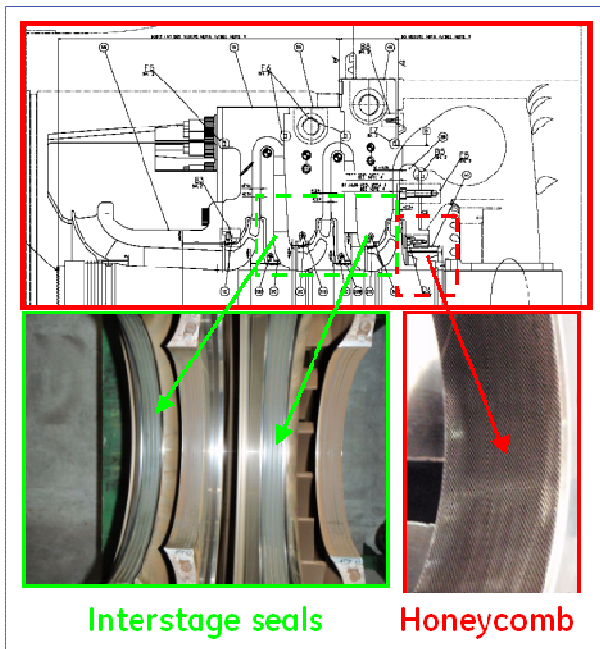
Interstage labyrinth seals (a) and balance drum honeycomb seal (b) upon inspection.
